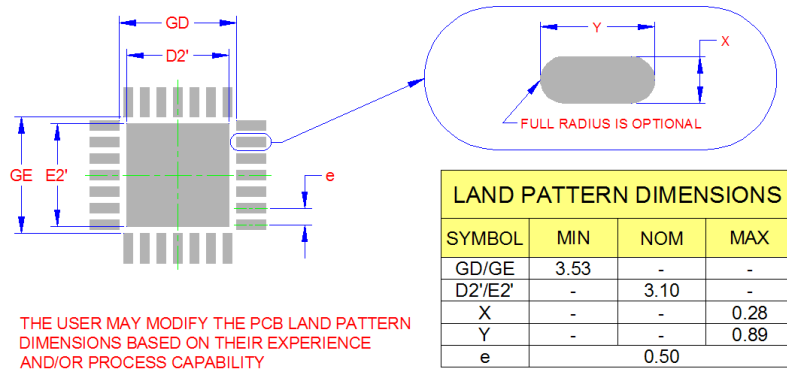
Recommended Printed Circuit Board (PCB) Land Pattern
